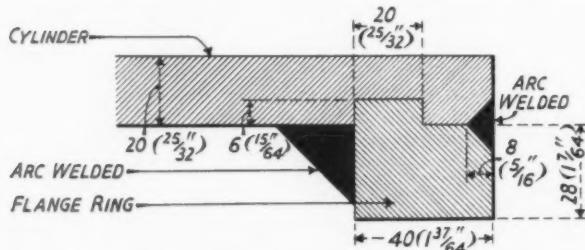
Showing arc-welded joints between cylinder and end ring
